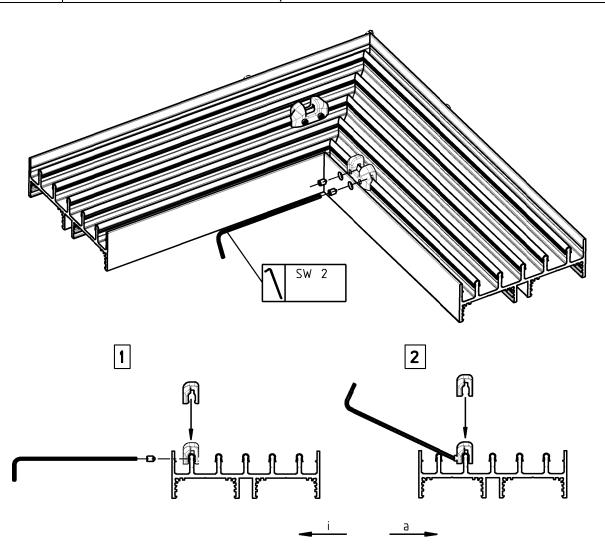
Assembly of the locking mechanism latch bolt on 90° corner units
